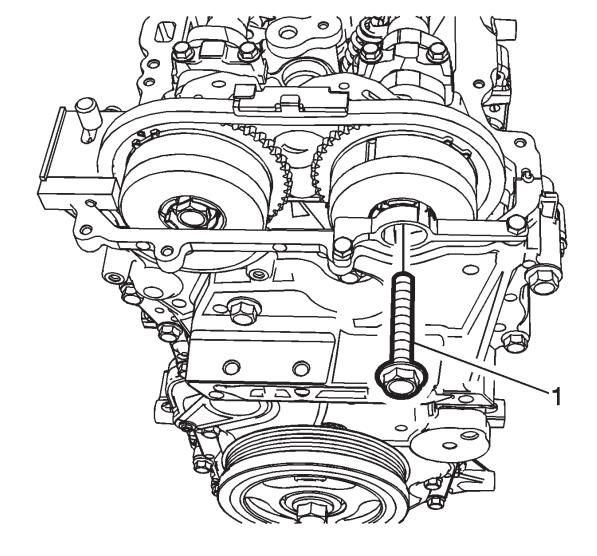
Camshaft Actuator Bolt Courtesy of GENERAL MOTORS COMPANY
